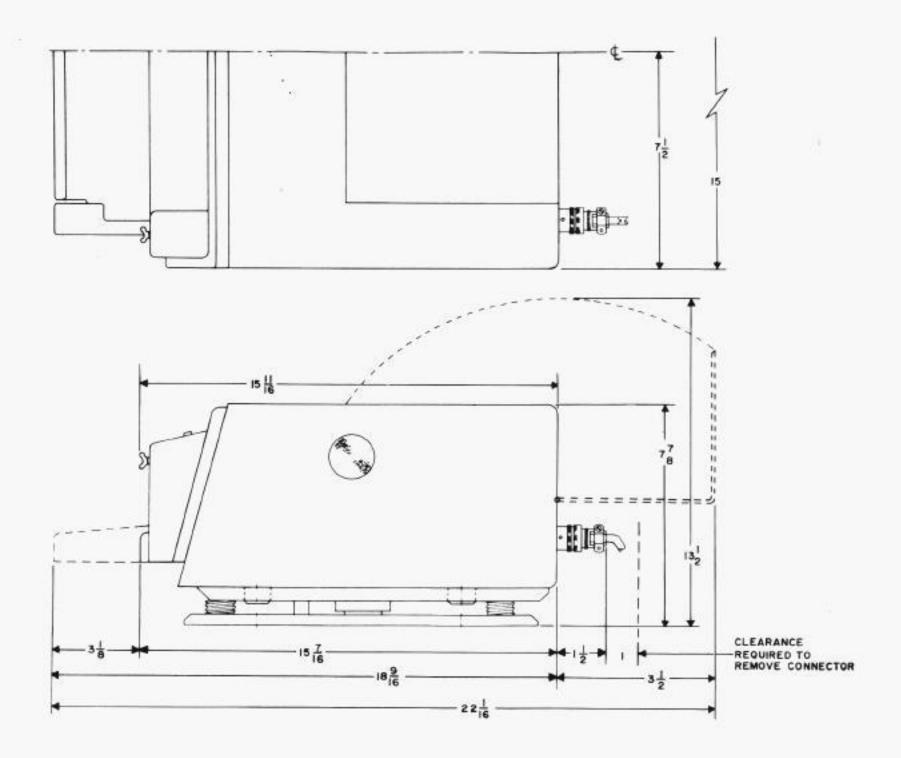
Non-Tactical Case CY-6063/UG (AN/UGC-41) Overall Dimensions
